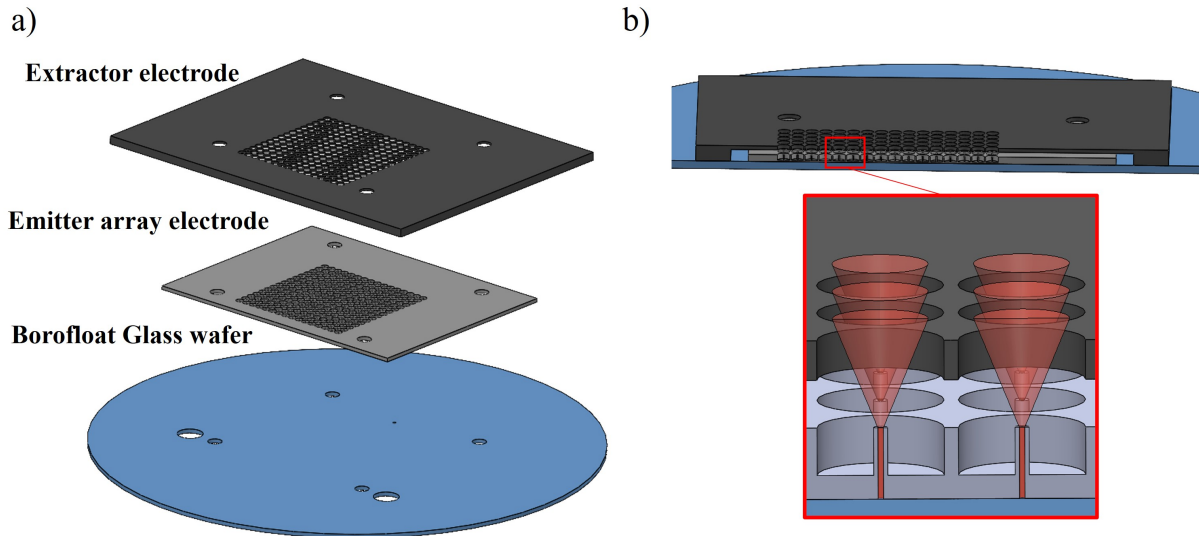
a) Exploded view of the components of the electro spray source; micromachined glass wafer, emitter array electrode, and extractor electrode b) Section view of the assembled electro spray head thruster showing the side gap and top gap between the emitter array electrode and the extractor electrode granting voltage isolation between them.
